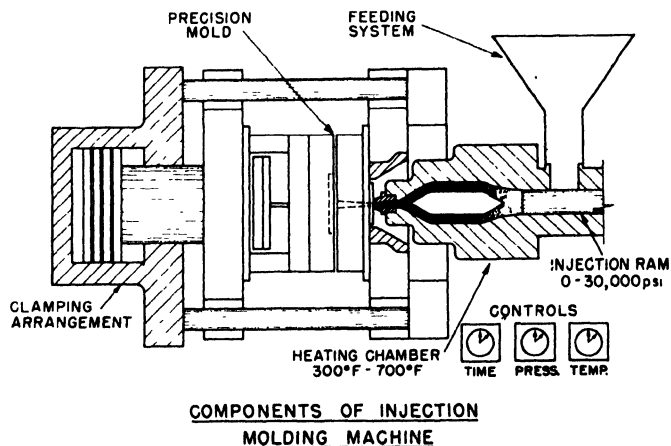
Schematic drawing of an injection molding machine comprising: (1) feeder, (2) plunger, (3) tunnel, (4) mold, (5) clamping device, and (6) controls.
